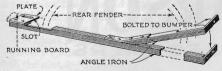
A rear fender guard like this prevents motorists from hooking your bumpers. It can be removed easily and quickly for changing tires
